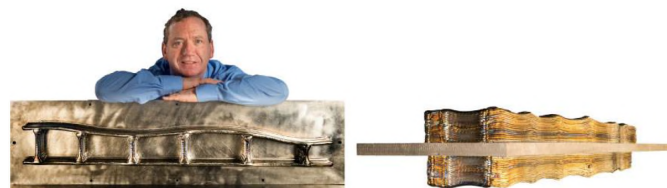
Ti-6Al-4V wing spars (1.2m long) built back-to-back on a sacrificial build plate for BAE Systems [352]: side view show one wing spar (left) and top view showing both wing spars (right).
